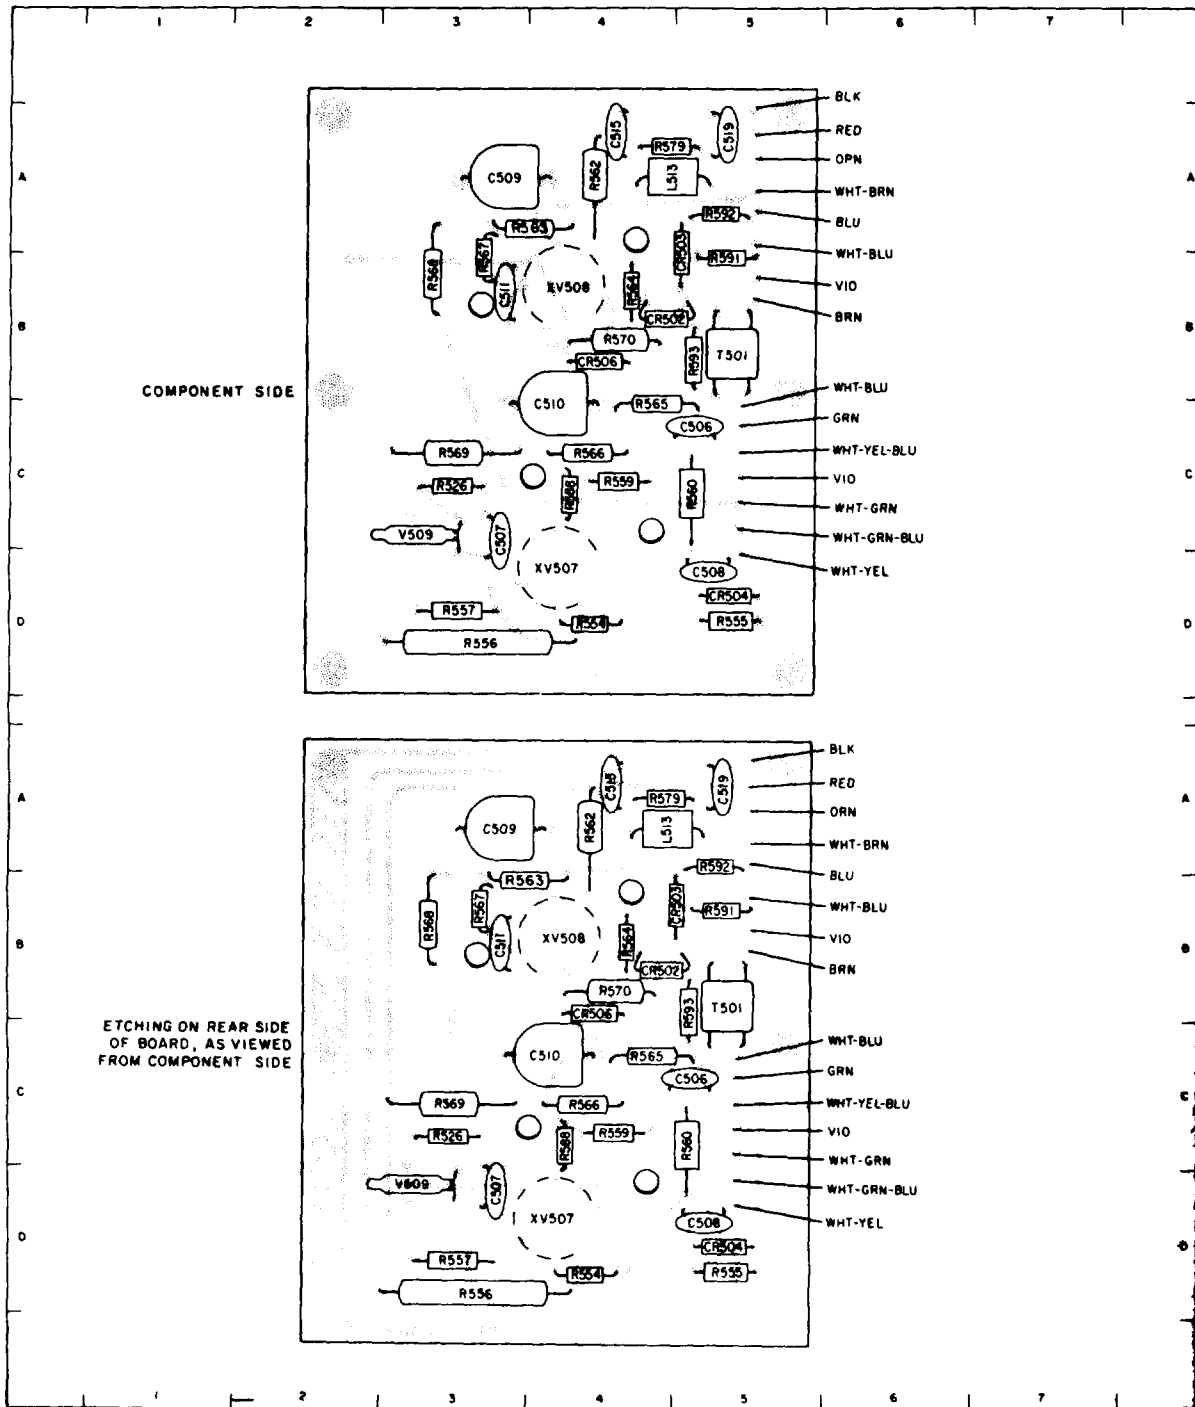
MX-2930B/USM Vertical Switching Etched Circuit Assembly, Location of Parts
